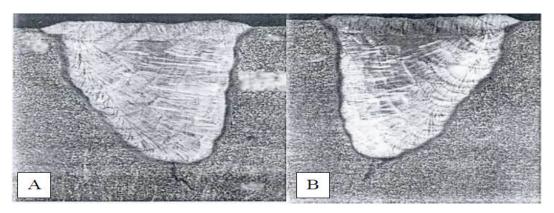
Macrostructure of weld No. 1 – cross-section A and B
